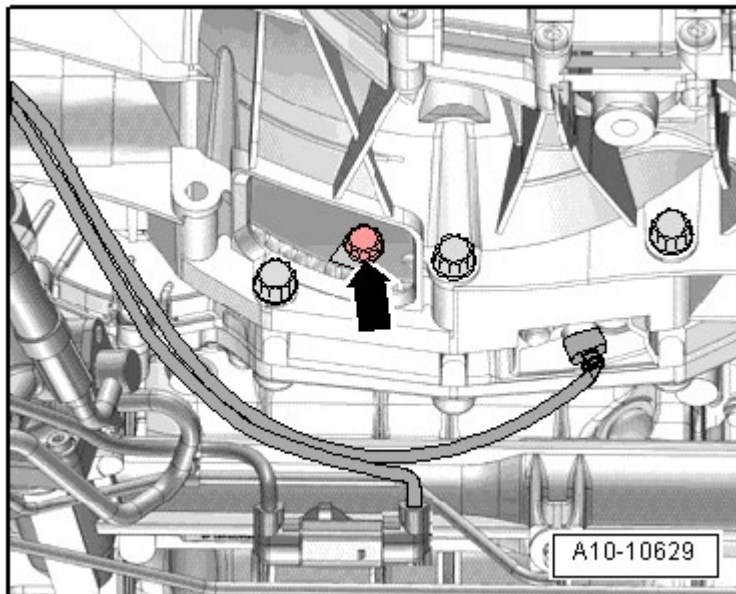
Identifying Clutch Module First Bolt Installation Location
